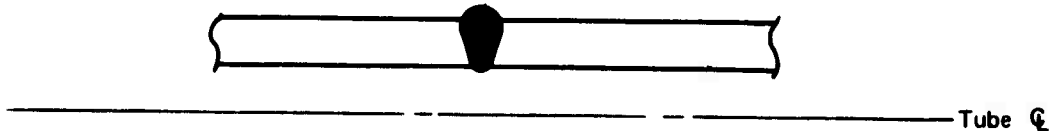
BUTT WELD BEAD CONFIGURATION
